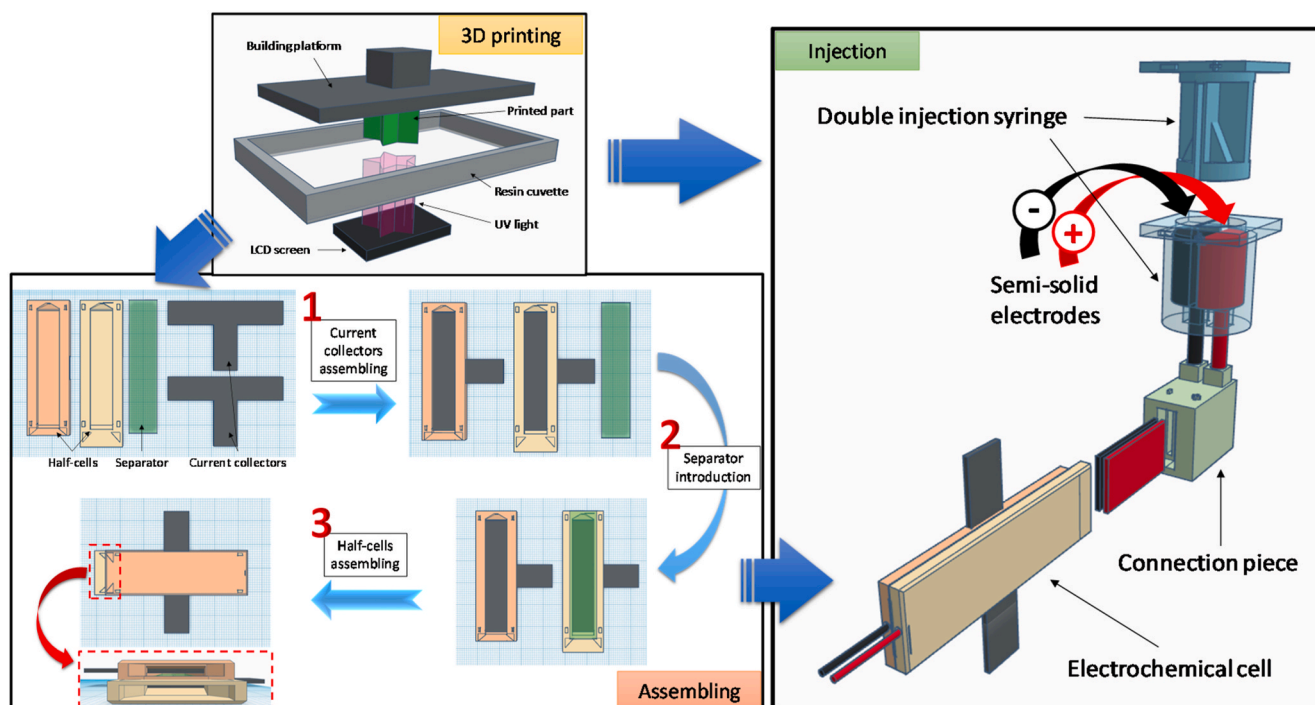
Description of the fabrication process of a 3D printed injectable battery. 3D printing (CAD model design and 3D printing of the pieces), assembling (current collector, separator and half-cells assembling, a zoom of the inlet is also shown) and injection (SSEs preparation, transfer to the 3D printed syringe, connection with the empty electrochemical cell and injection) steps.
